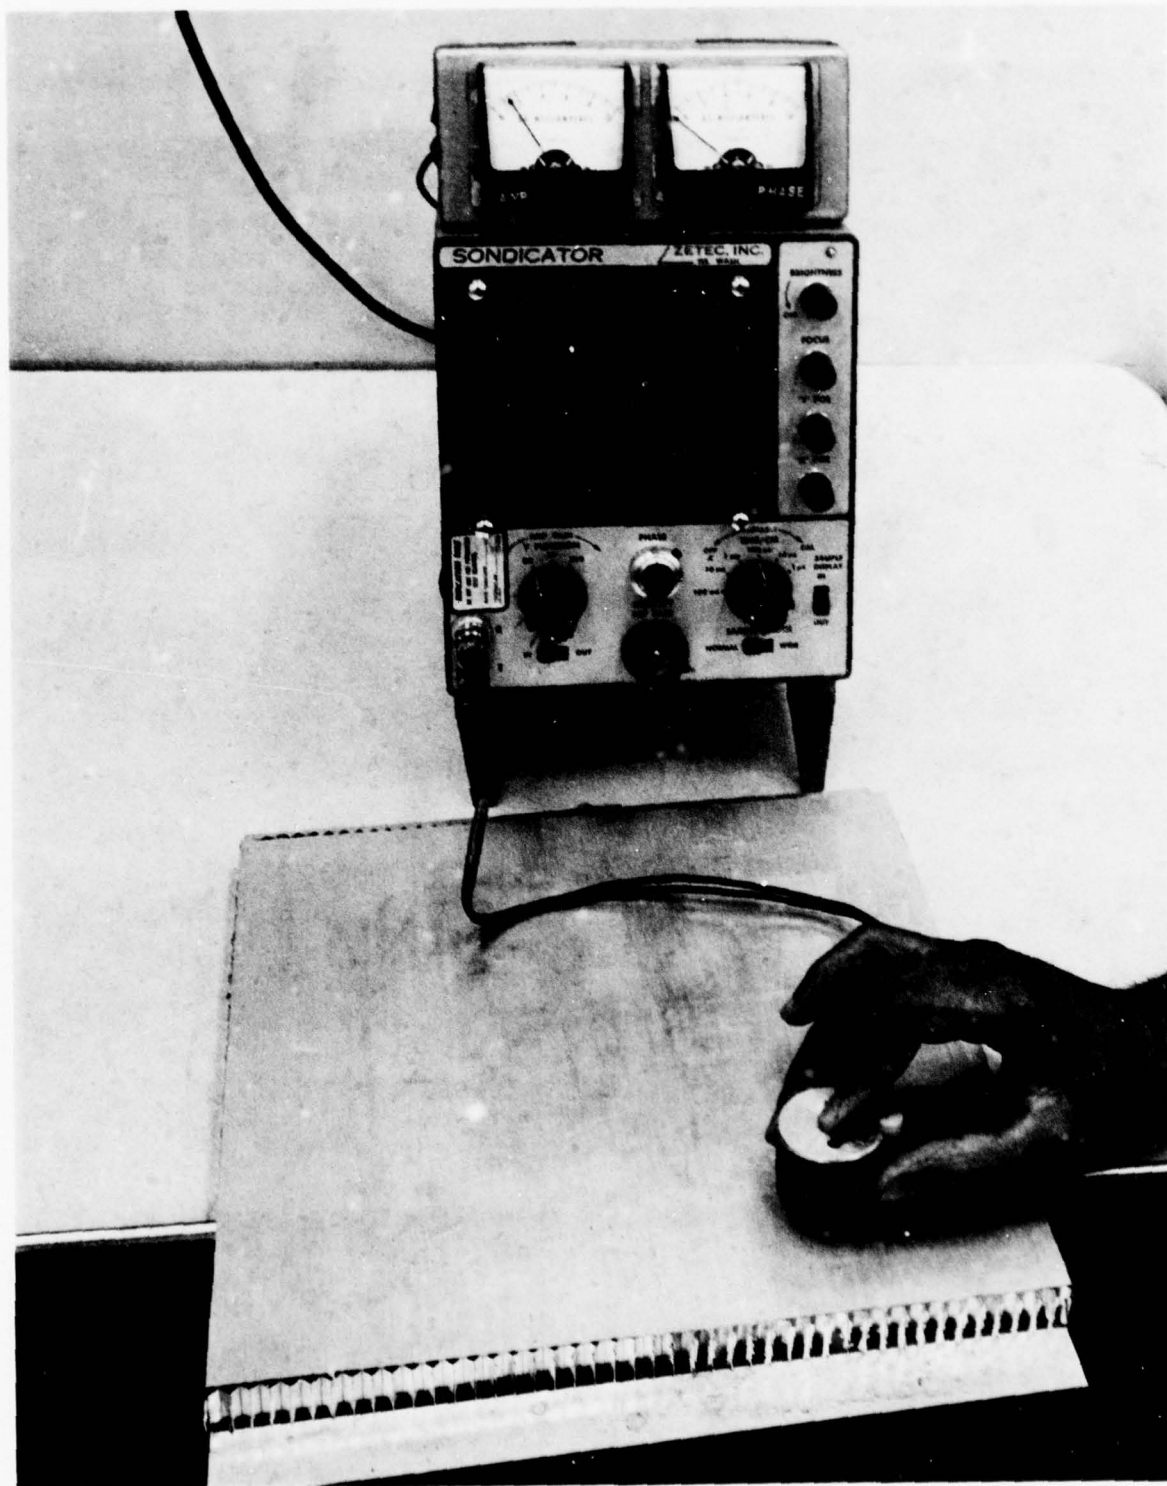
The Sondicator Being Used to Inspect Honeycomb Panel From One Side
